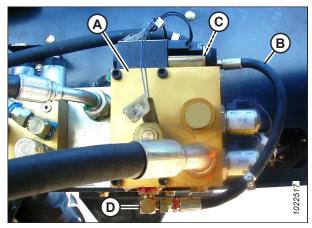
Draper Header Hose Position (M150 Shown; M200, M155, and M155*E*4 Similar)
